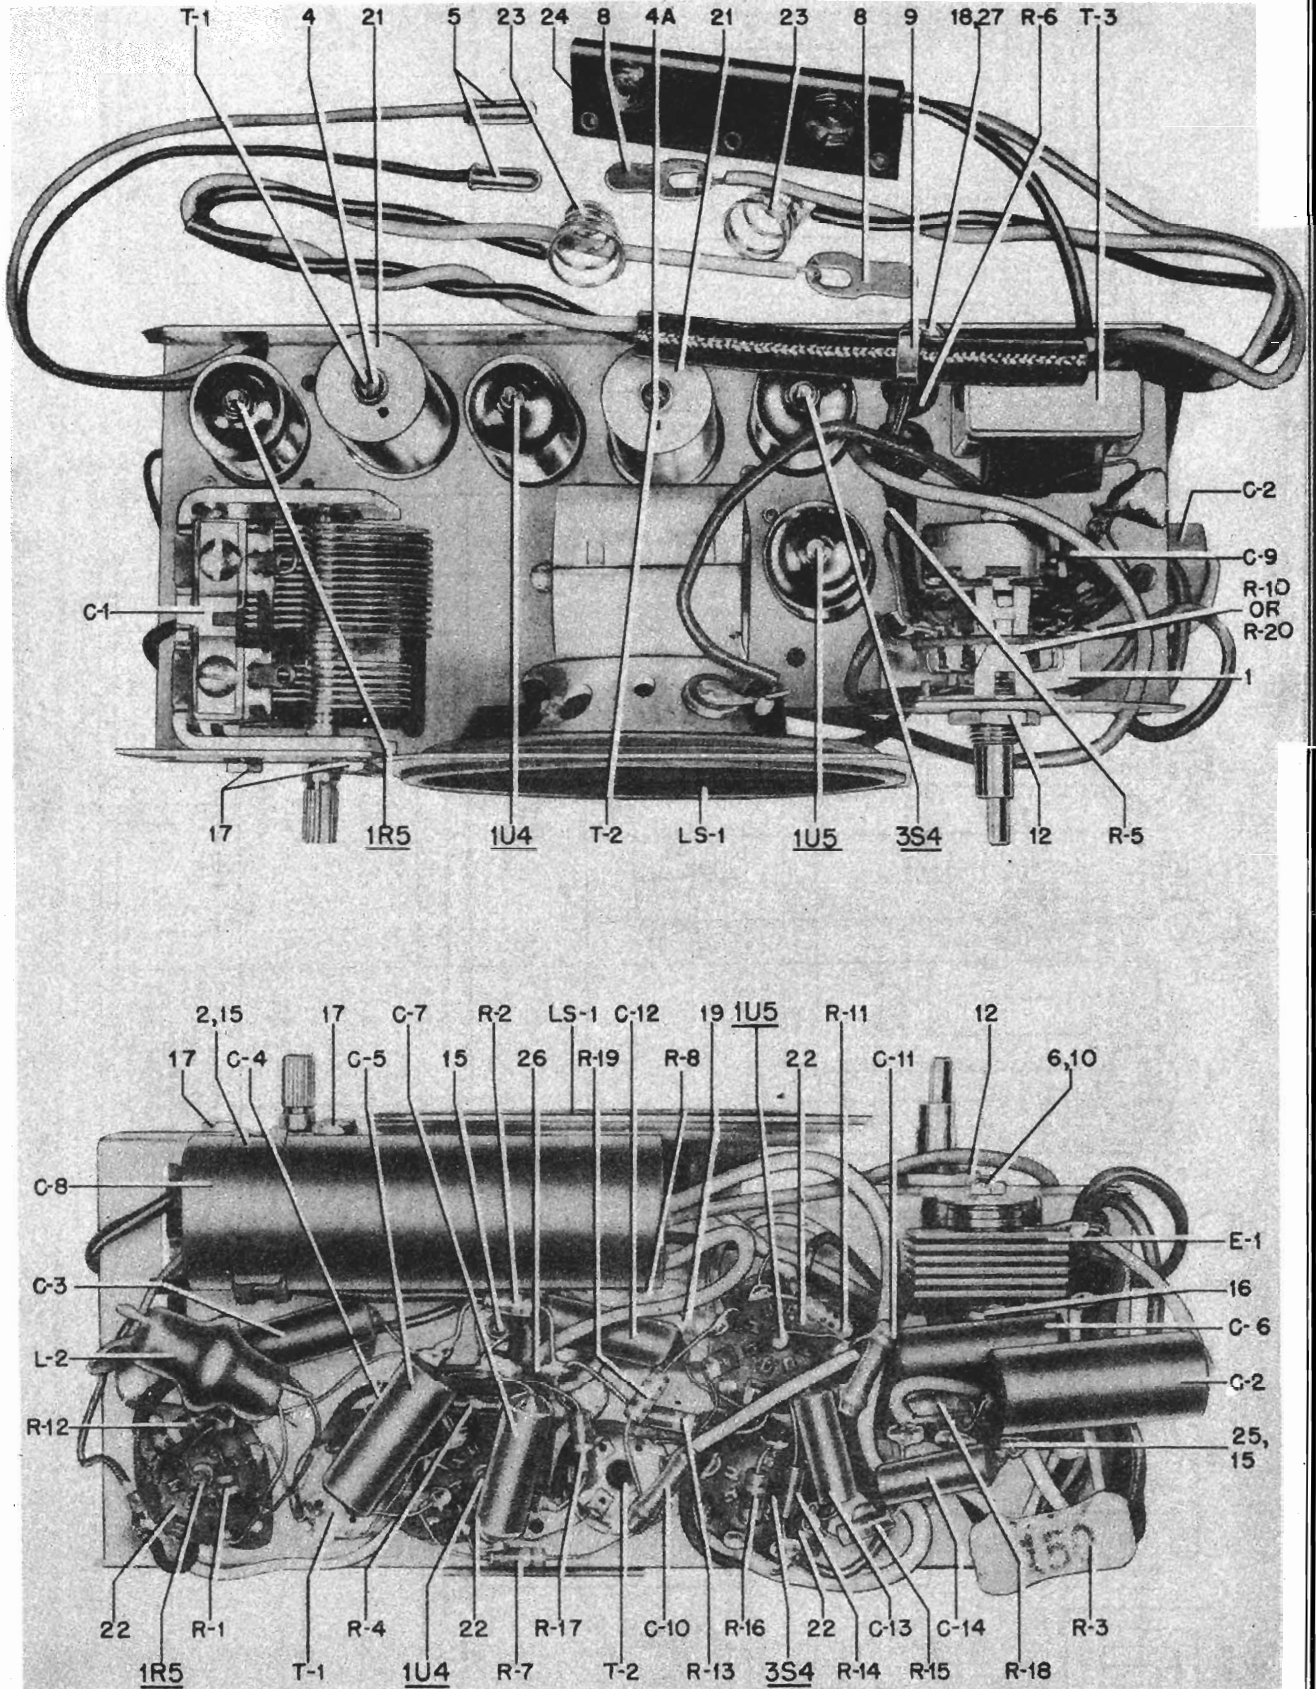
PARTS LOCATION - CHASSIS TOP & BOTTOM
